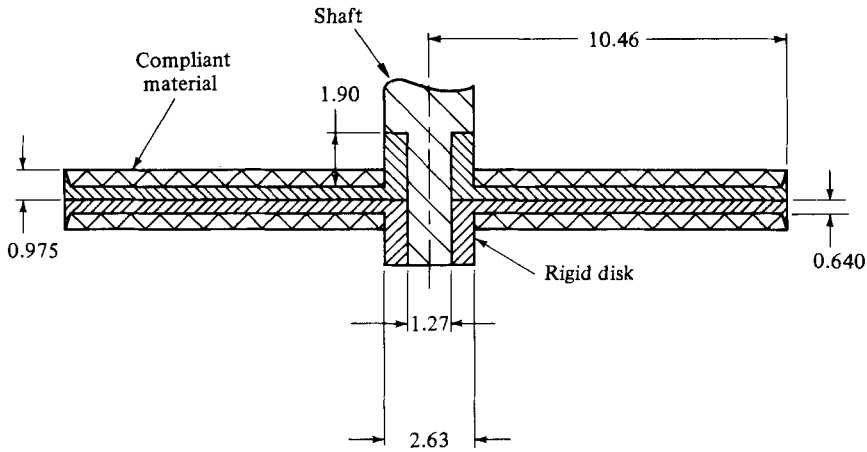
Schematic drawing of the larger (20.92 cm diameter) disk assembly (Hansen & Hunston 1974).
